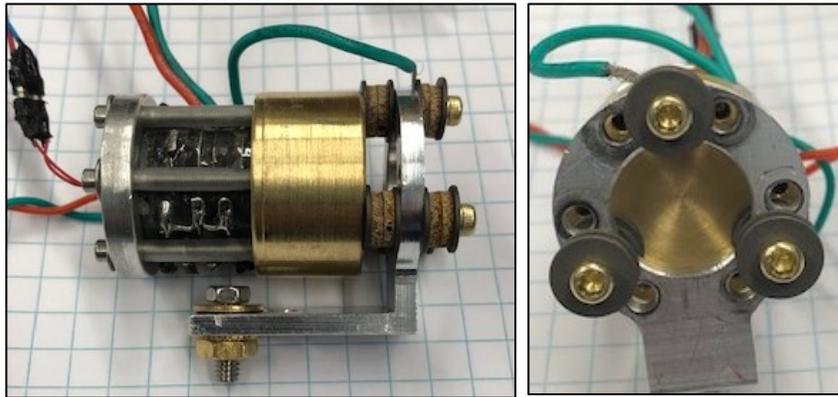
Shows the L mounting bracket using the 0.618 inch brass glued stack. The 3 screws used to hold the brass have been placed into holes which were drilled in addition to the 6 regular holes. There is one top screw and two lower screws on either side in a equilateral triangle arrangement. This is a symmetric pattern.
